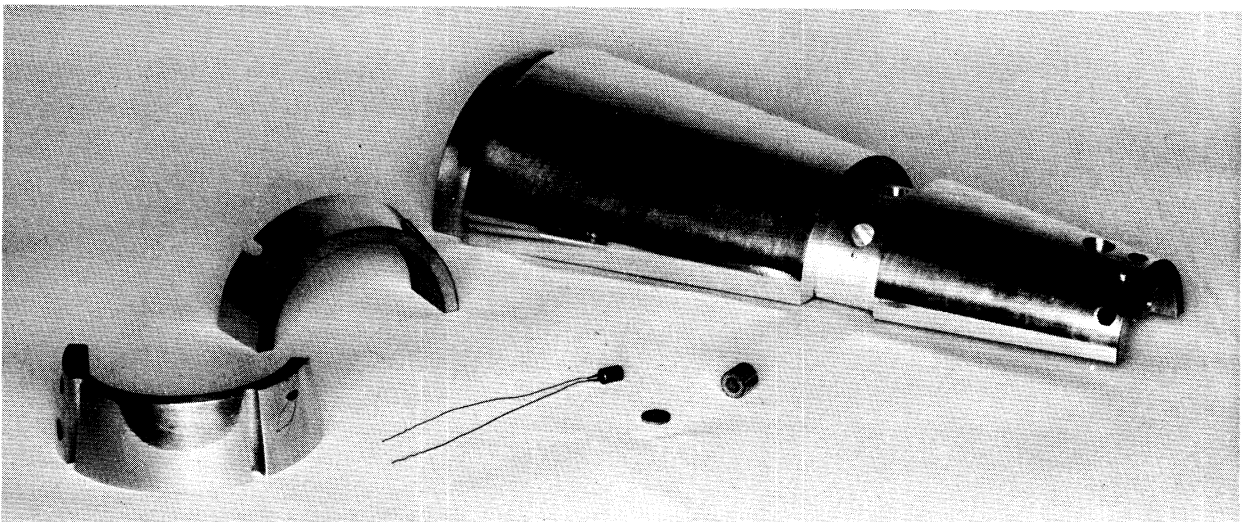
Cone half with squib-insulator assembly and frangible ring.
